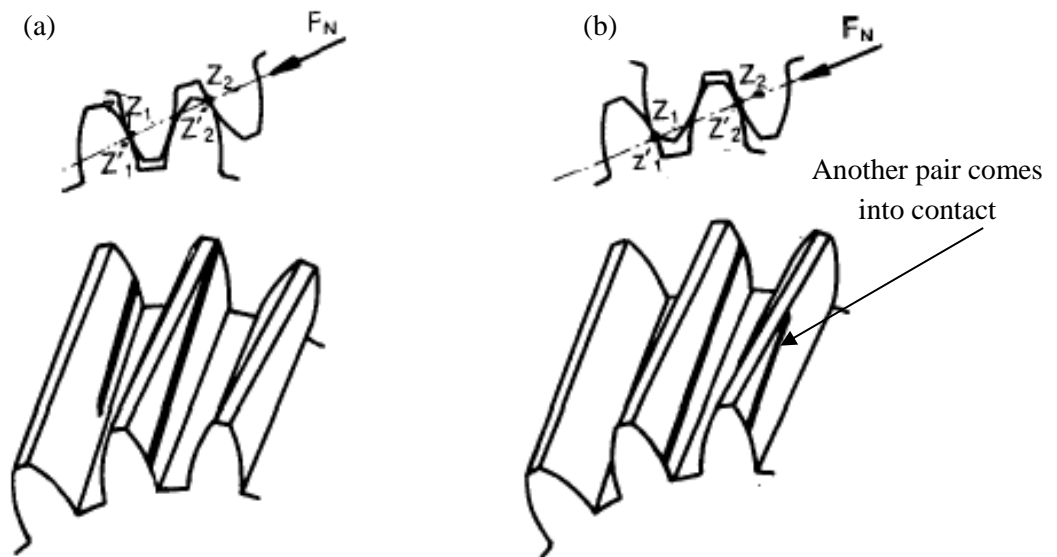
Nature of tooth engagement in helical gear drive (Maitra 1994).
